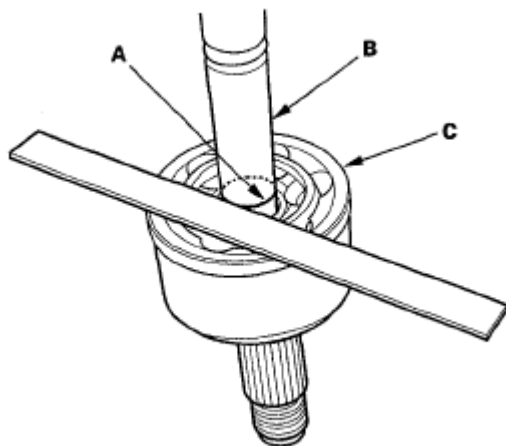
Identifying Grease To Expose Driveshaft And Outboard Joint Inner Race
